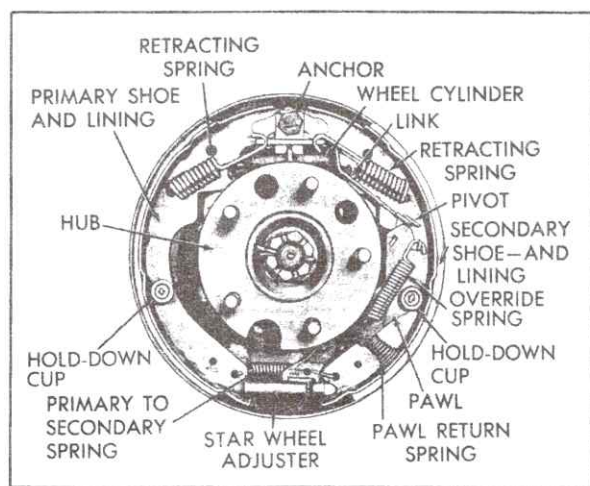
Front Wheel Brake Mechanism (Left Side)
